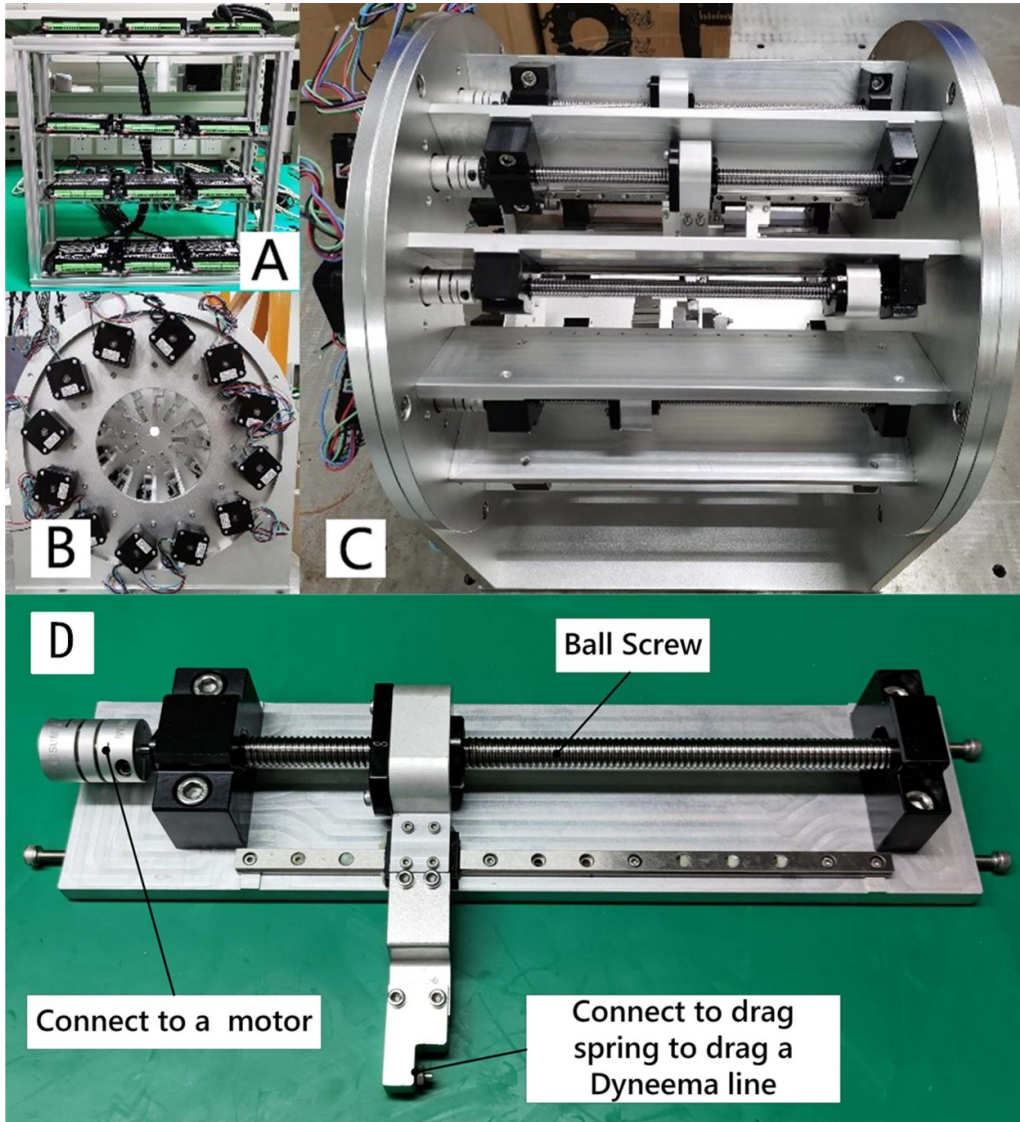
Drive system. (A) Drives of motors. (B) Twelve motors mounted on the supporting board. (C) Twelve drive units mounted on the supporting board. (D) Drive unit.
